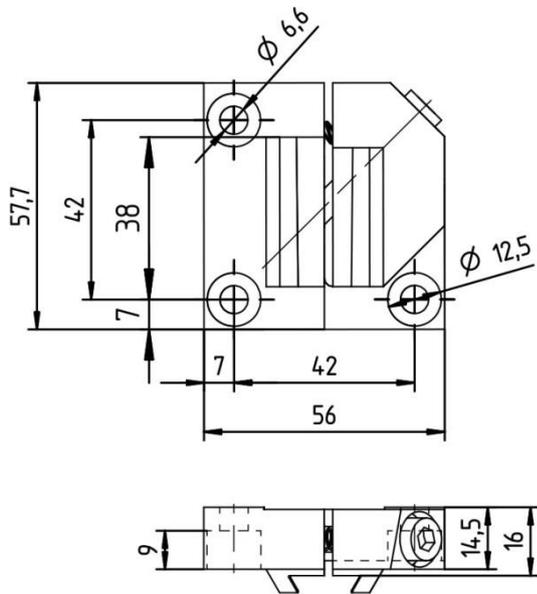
Dimension drawing BE 901 FA-001 mounting device (all dimensions in mm)
